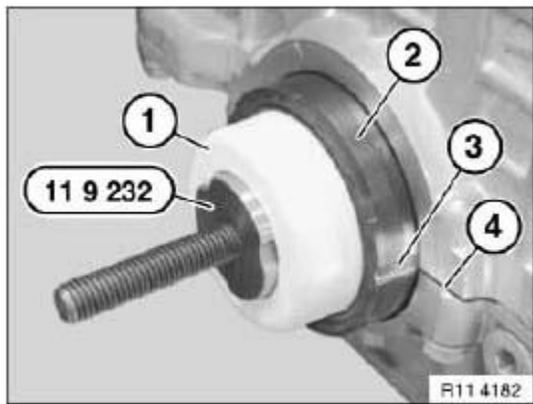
Pushing Support Sleeve With Crankshaft Seal Onto Special Tool 11 9 232
